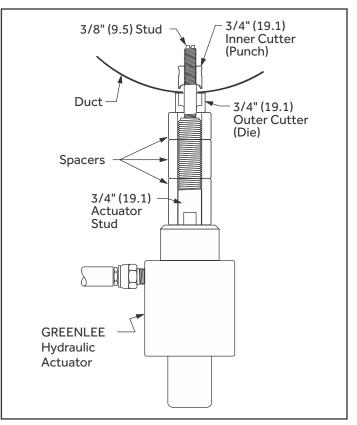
3/4" (19.1) Hydraulic Punch Configuration
